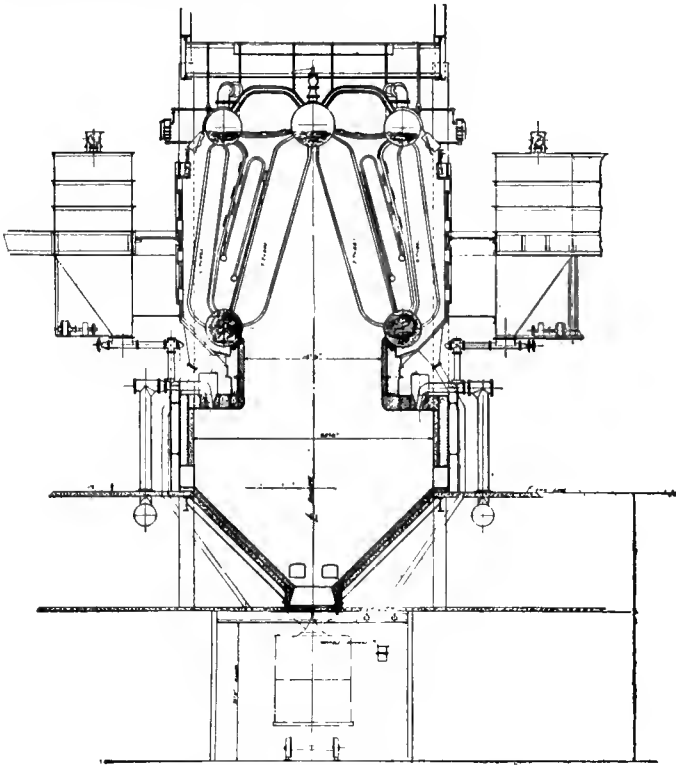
Fuller 2400 H. P. Sterling Boiler.
